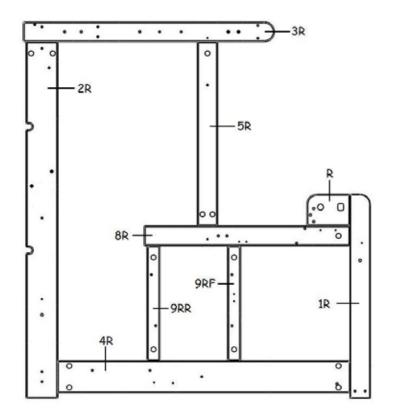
Right Side Frame Assembly, inside view (holes will differ on Left Side Frame)
